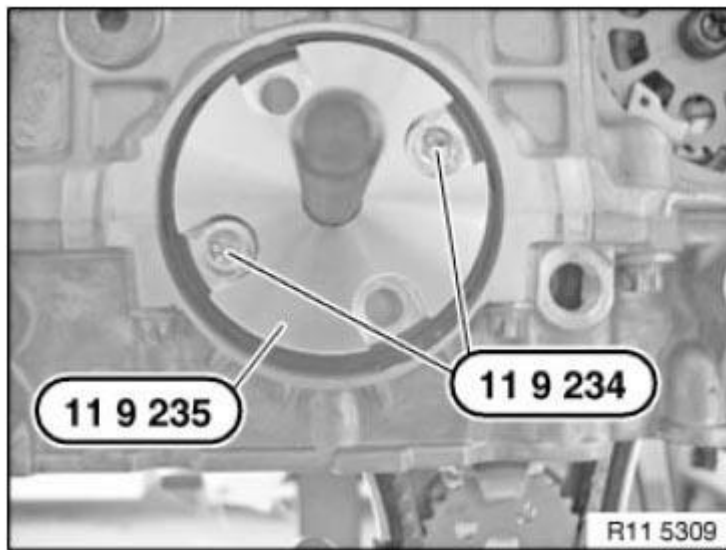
Mounting Special Tool 11 9 235 With Special Tool 11 9 234 On Crankshaft
